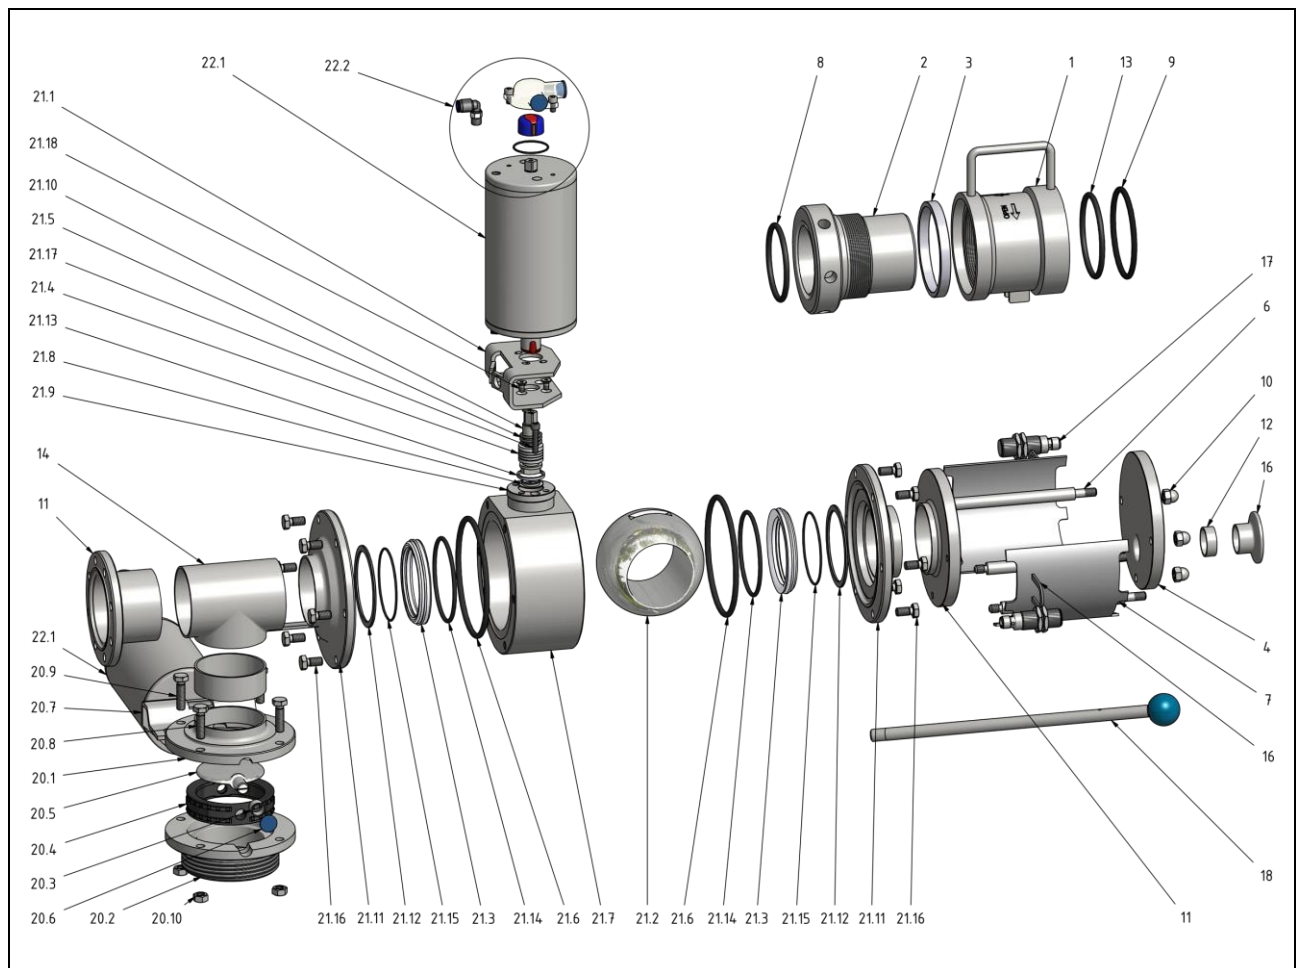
Structure of Plug-in Chamber with Ball Valve and Butterfly Valve
